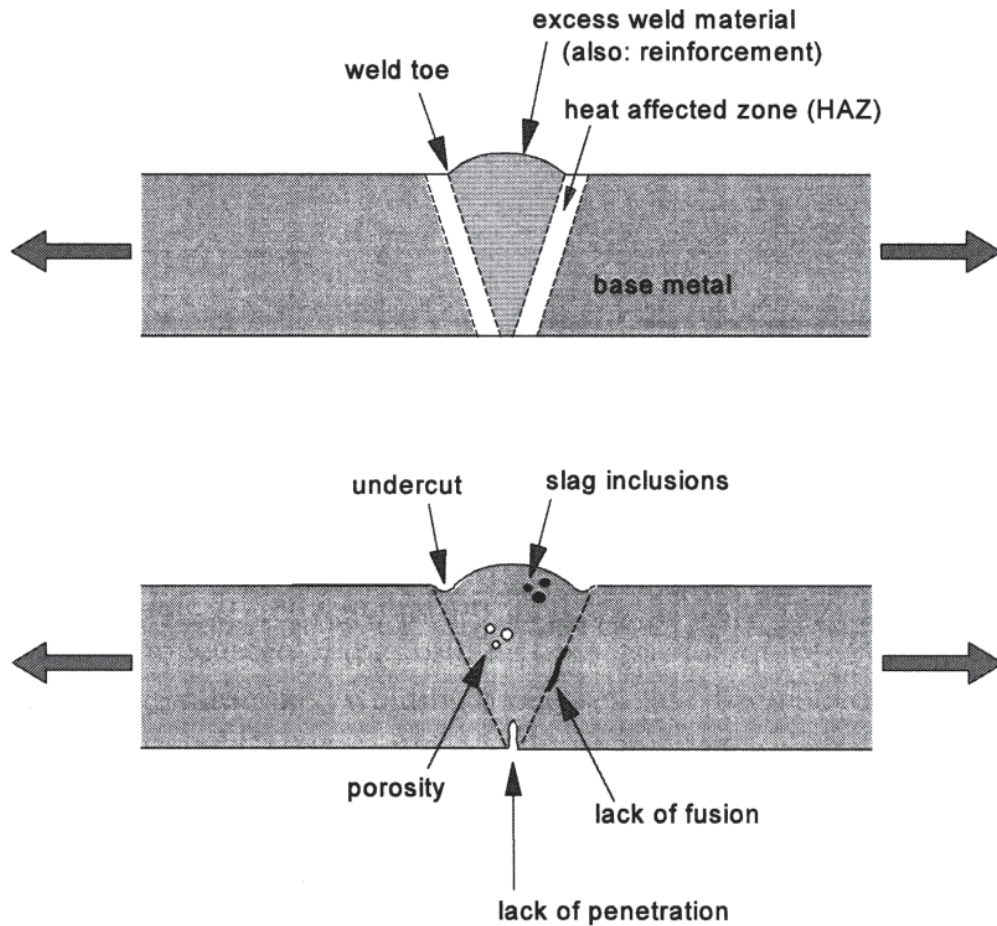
Examples of welding flaws in a butt welded joint, [5]
